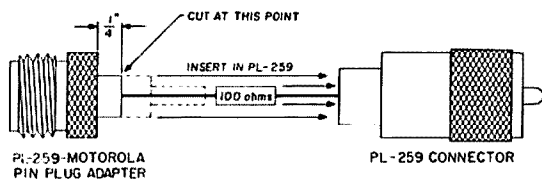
Construction details for the 100-ohm range extender unit. A PL-259 to Motorola pin plus adapter is first prepared by cutting off all but ¼" (6.5mm) of the pin and shank. A ½ watt, 100-ohm resistor is then inserted in the pin of this adapter and soldered. The shortened shank and resistor are then inserted in the back of the PL-259 plug. The other resistor wire is soldered to the center pin of the PL-259 connector. Soldering the exterior surfaces together completes the assembly.
